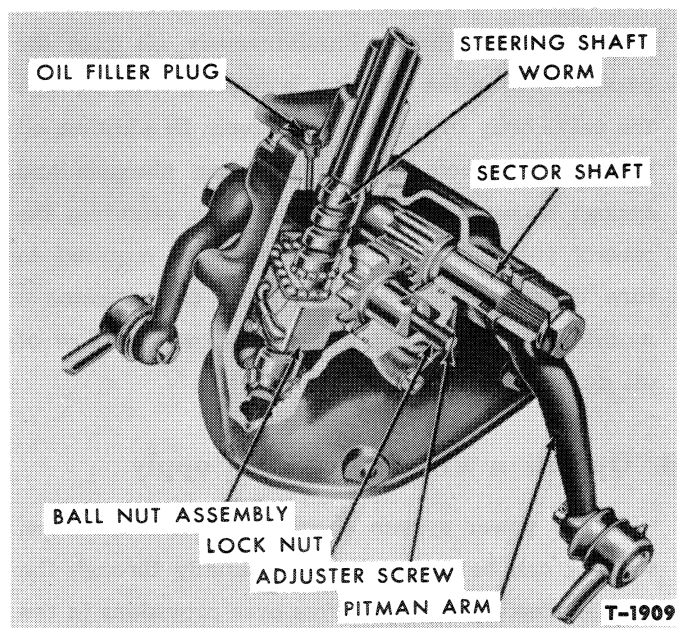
Recirculating Ball-and-Nut-Type Steering Gear
